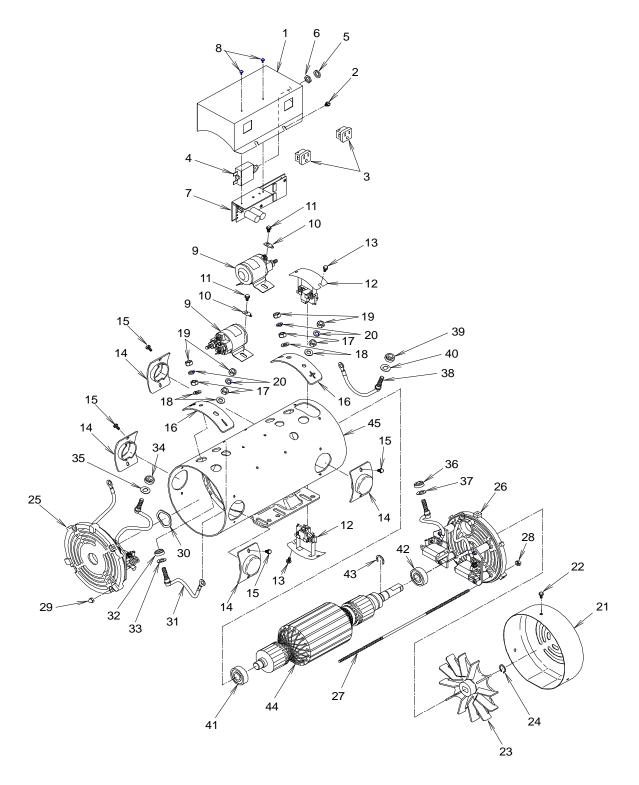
12-Volt Large Frame Generator, Current Version
